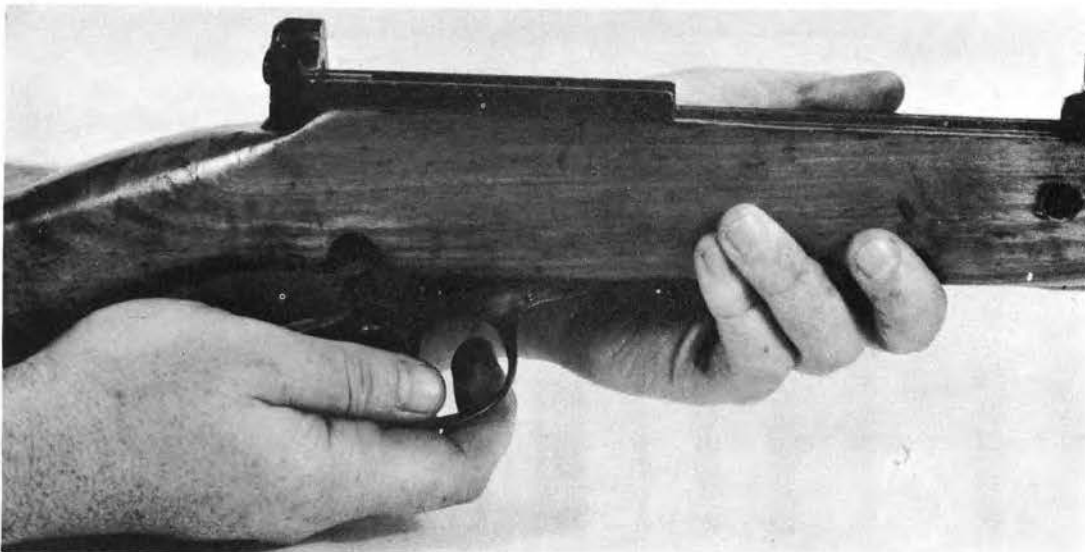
REMOVING TRIGGER MECHANISM (STEP 2).
